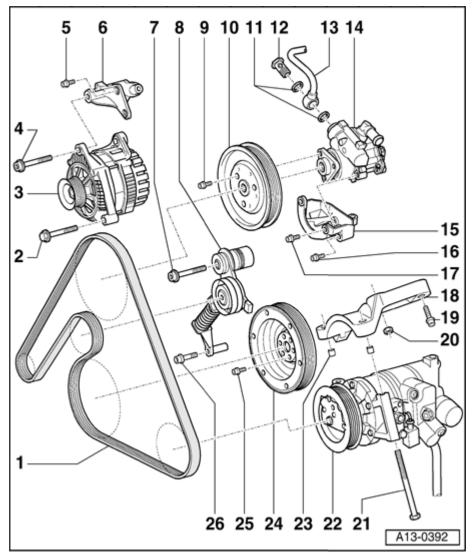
Ribbed Belt For Power Steering Pump, Generator And A/C System Remove/Install
